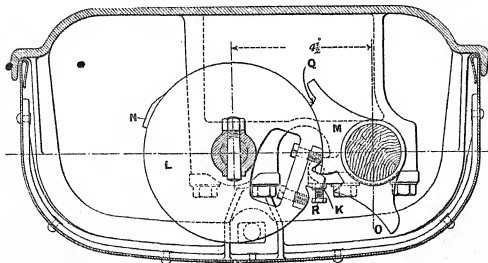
Section of Dick Kerr Controller near bottom shewing interlocking gear.
